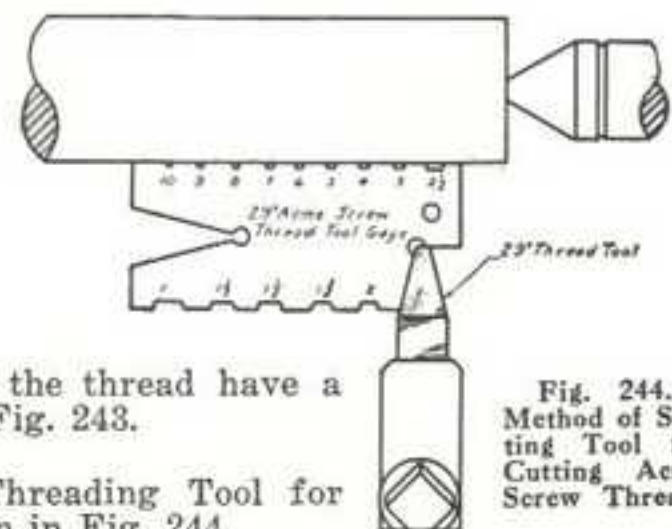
Method of Setting Tool for Cutting Acme Screw Threads
